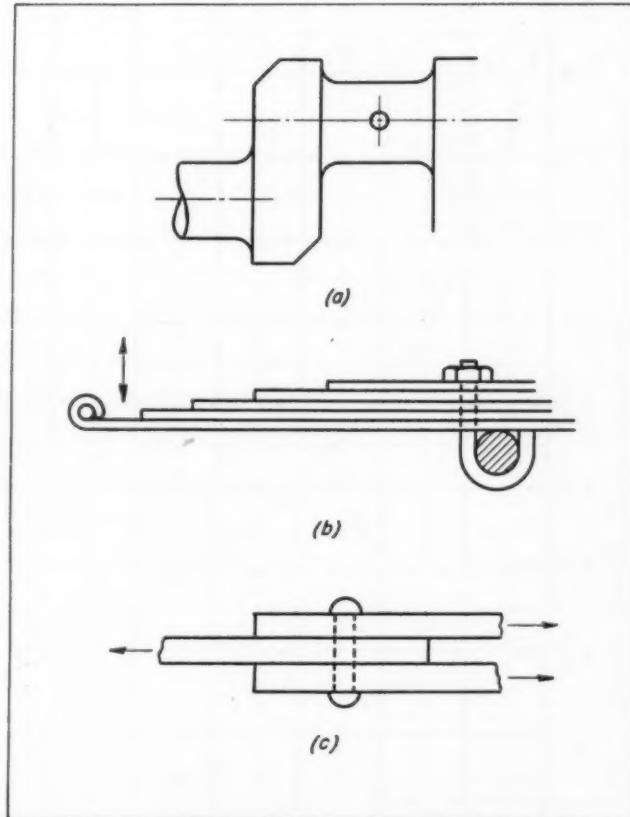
Examples of parts with transverse holes. At *a* is shown a crankshaft with an oilhole (bending and torsion); at *b*, a leaf spring clamp (bending); at *c*, a riveted plate (tension)
